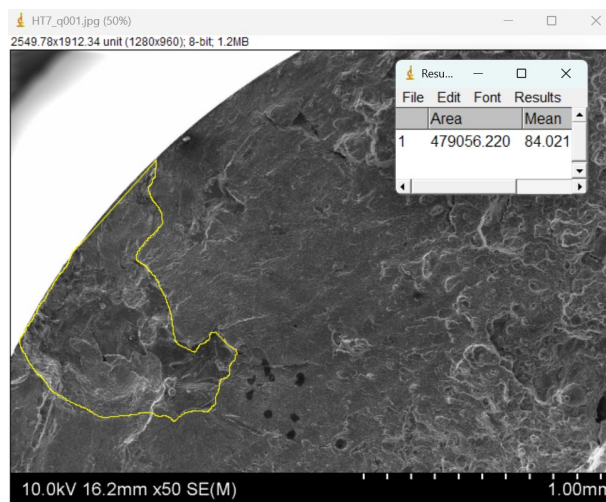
Fracture surface of sample CD⊥BD-HT-7, x50
